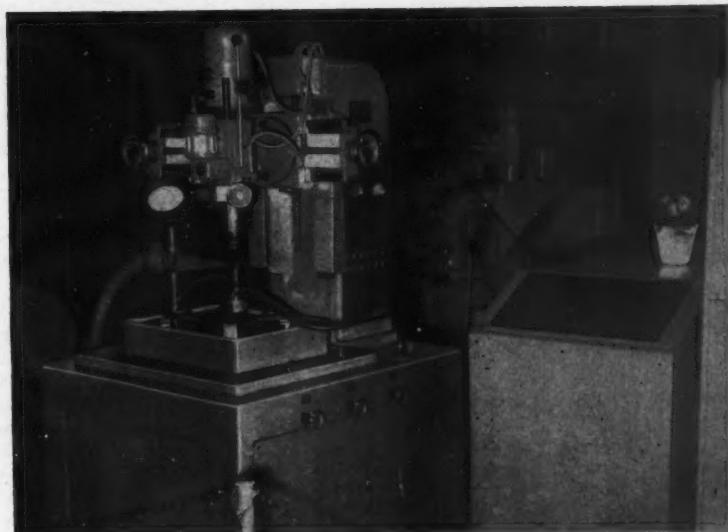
Working on a new principle, this type DM 554, electro-impulse machine employs a special generating unit and is capable of removing up to 0.07 cu. in. of metal per min. Electrode wear ranges from 0.2 to 25 per cent of the metal removal rate
